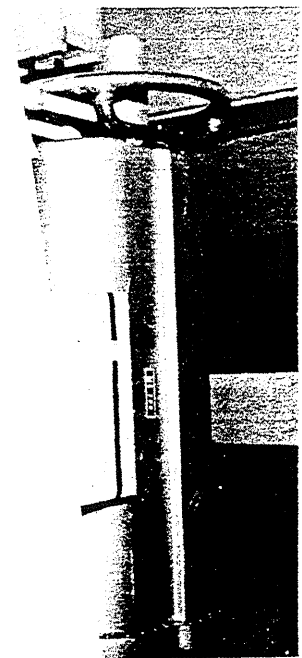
ILLINOIS' FATIGUE TESTING MACHINE AS USED FOR AXIAL LOADING OF WELDED JOINTS
